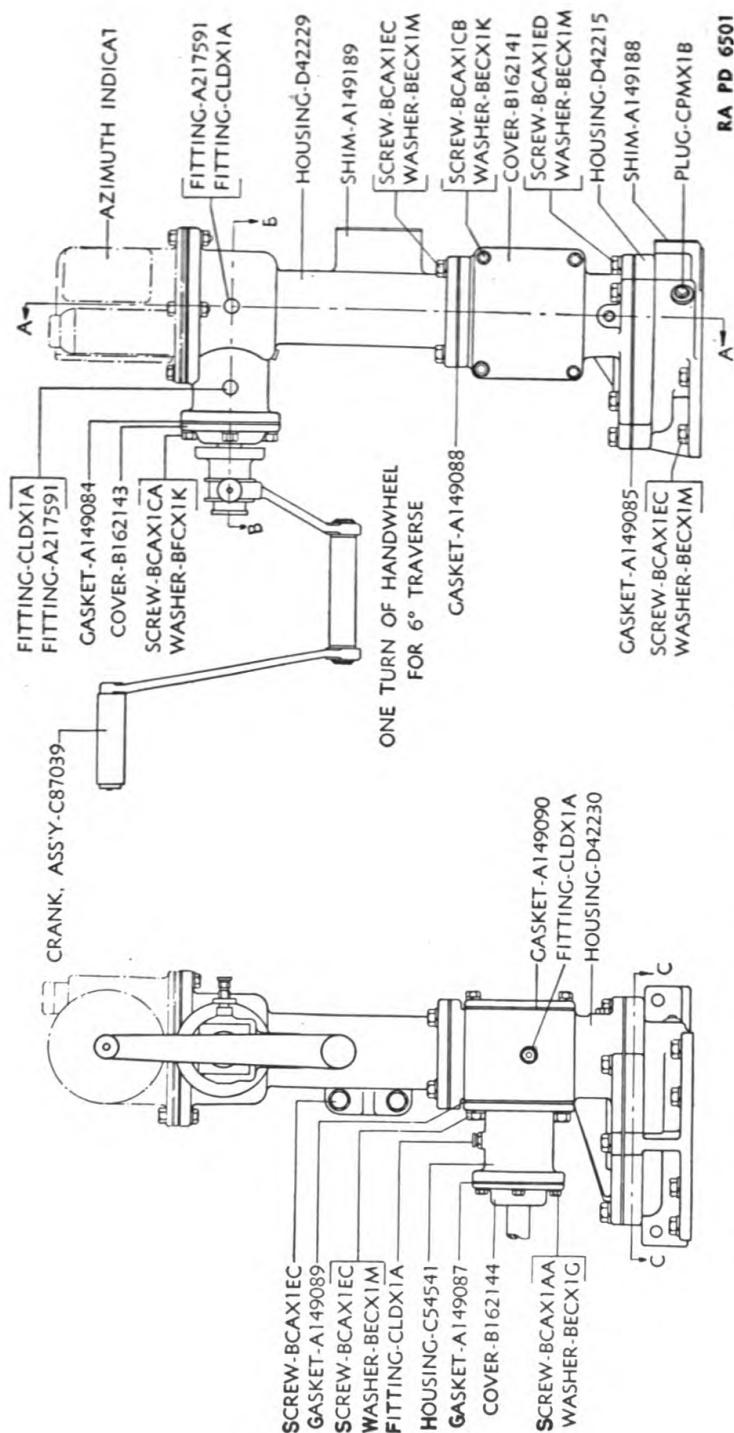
Traversing mechanism assembly, M3A1 carriage (sections shown in fig. 26).
